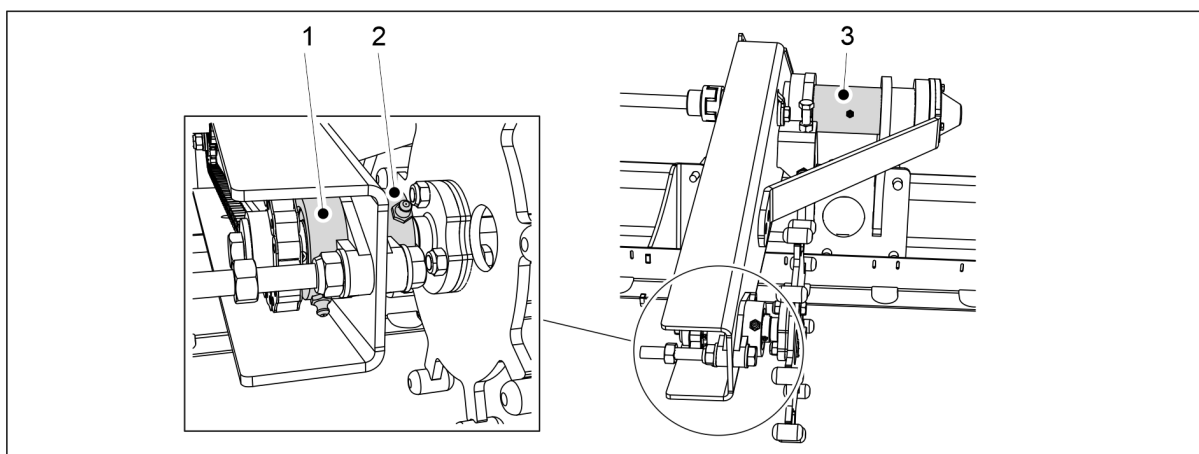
242. Lubricating wheel axle bearings
